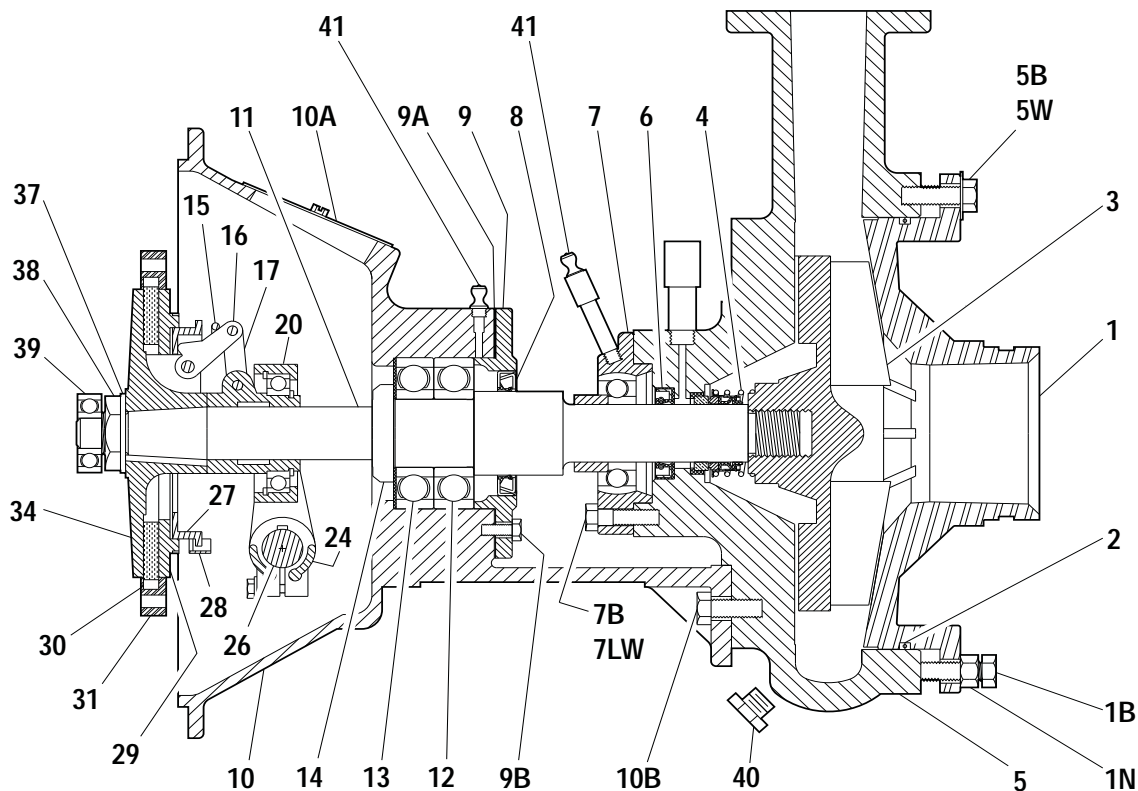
Cross-Section Through Clutch/Pump Assembly (Clump)
